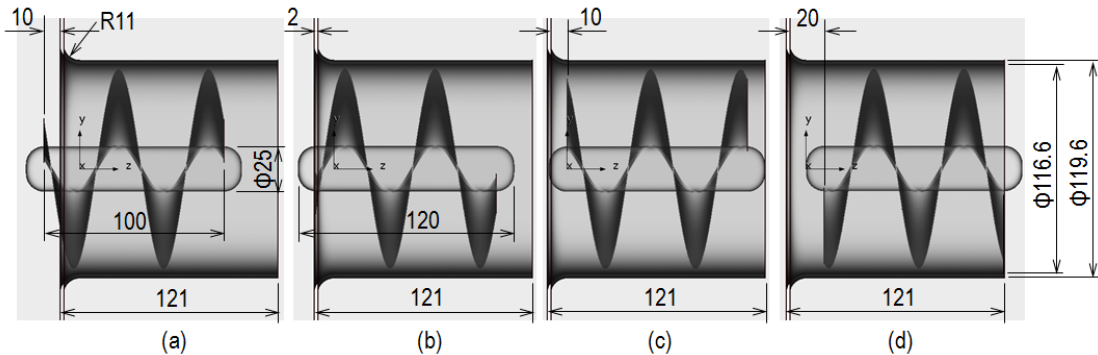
Geometry arrangement between helical impeller and bellmouth
